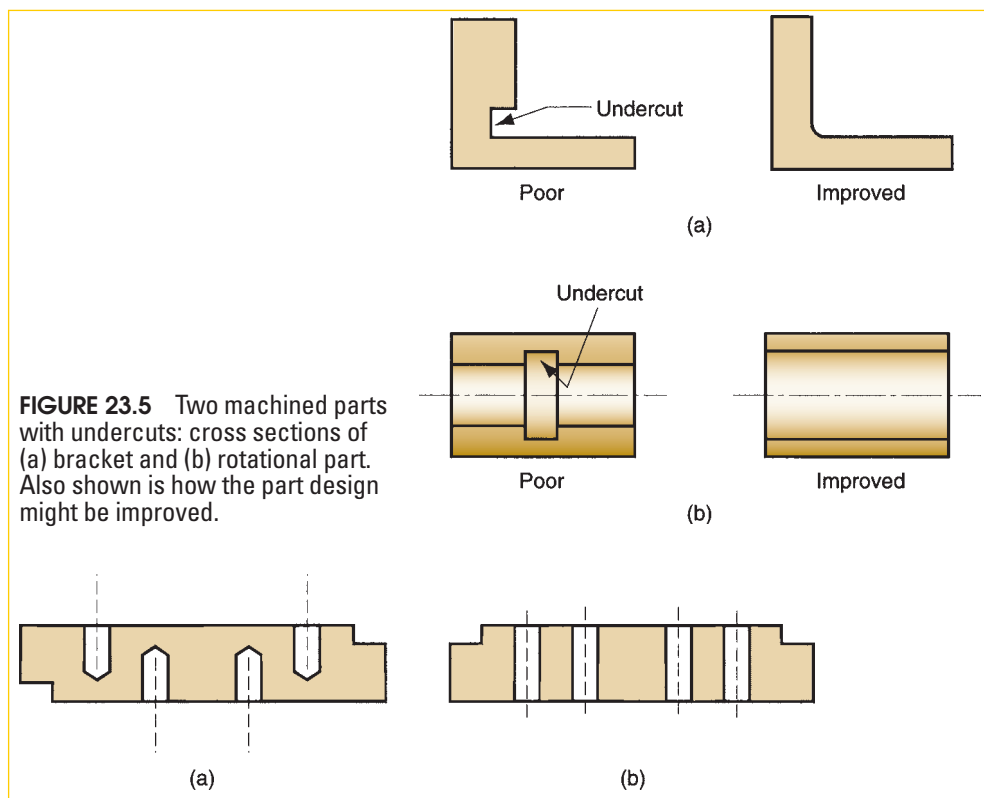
Two machined parts with undercuts: cross sections of (a) bracket and (b) rotational part. Also shown is how the part design might be improved.
